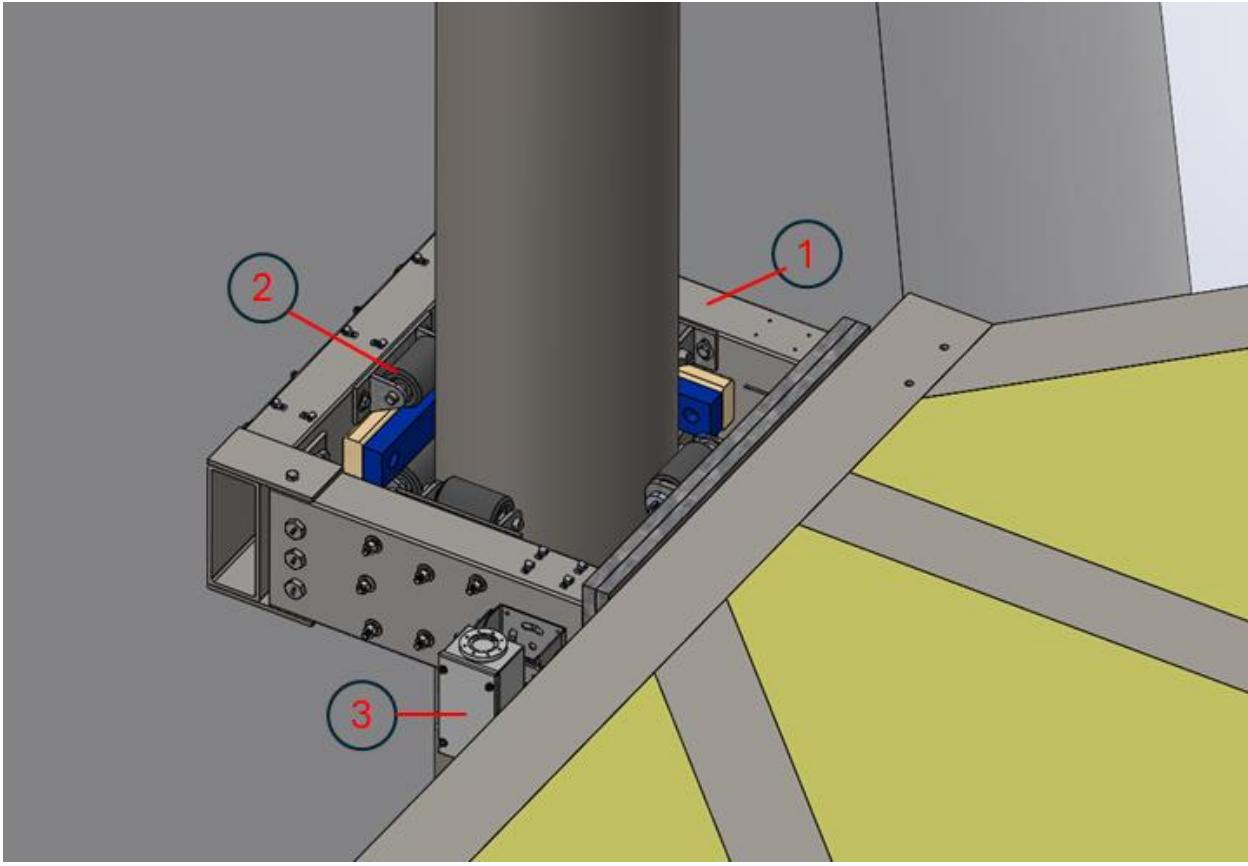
Detail view of new instrumented pile guide assembly, installed onto TDP. 1) PGA structural framework 2) Pile guide roller, with instrumented load pin axle 3) Platform elevation sensor
